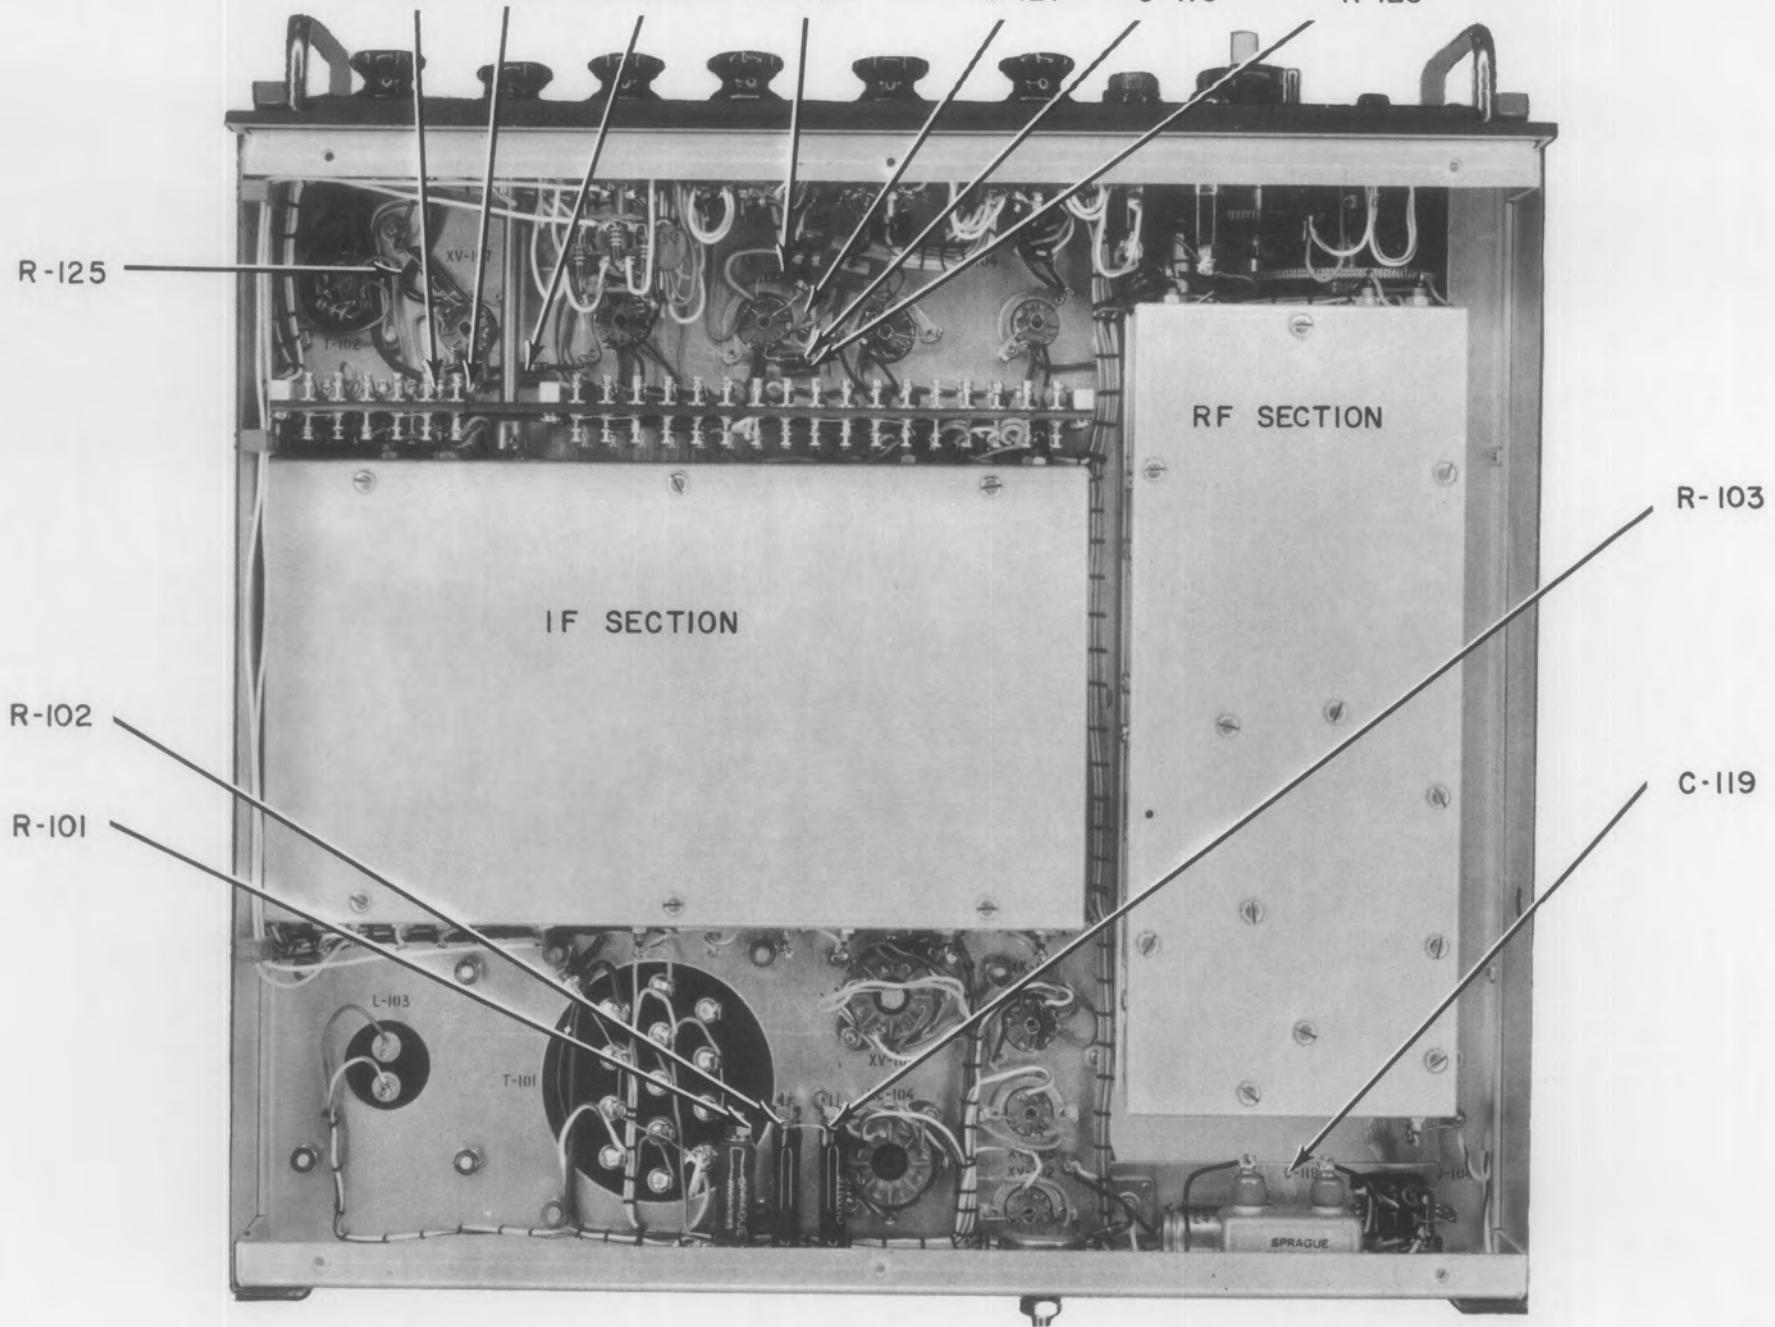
Model G-110B Receiver, Bottom View (Dust Cover Removed)
